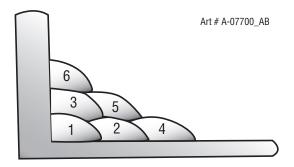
`14: Multi-runs in HV Fillet Weld
